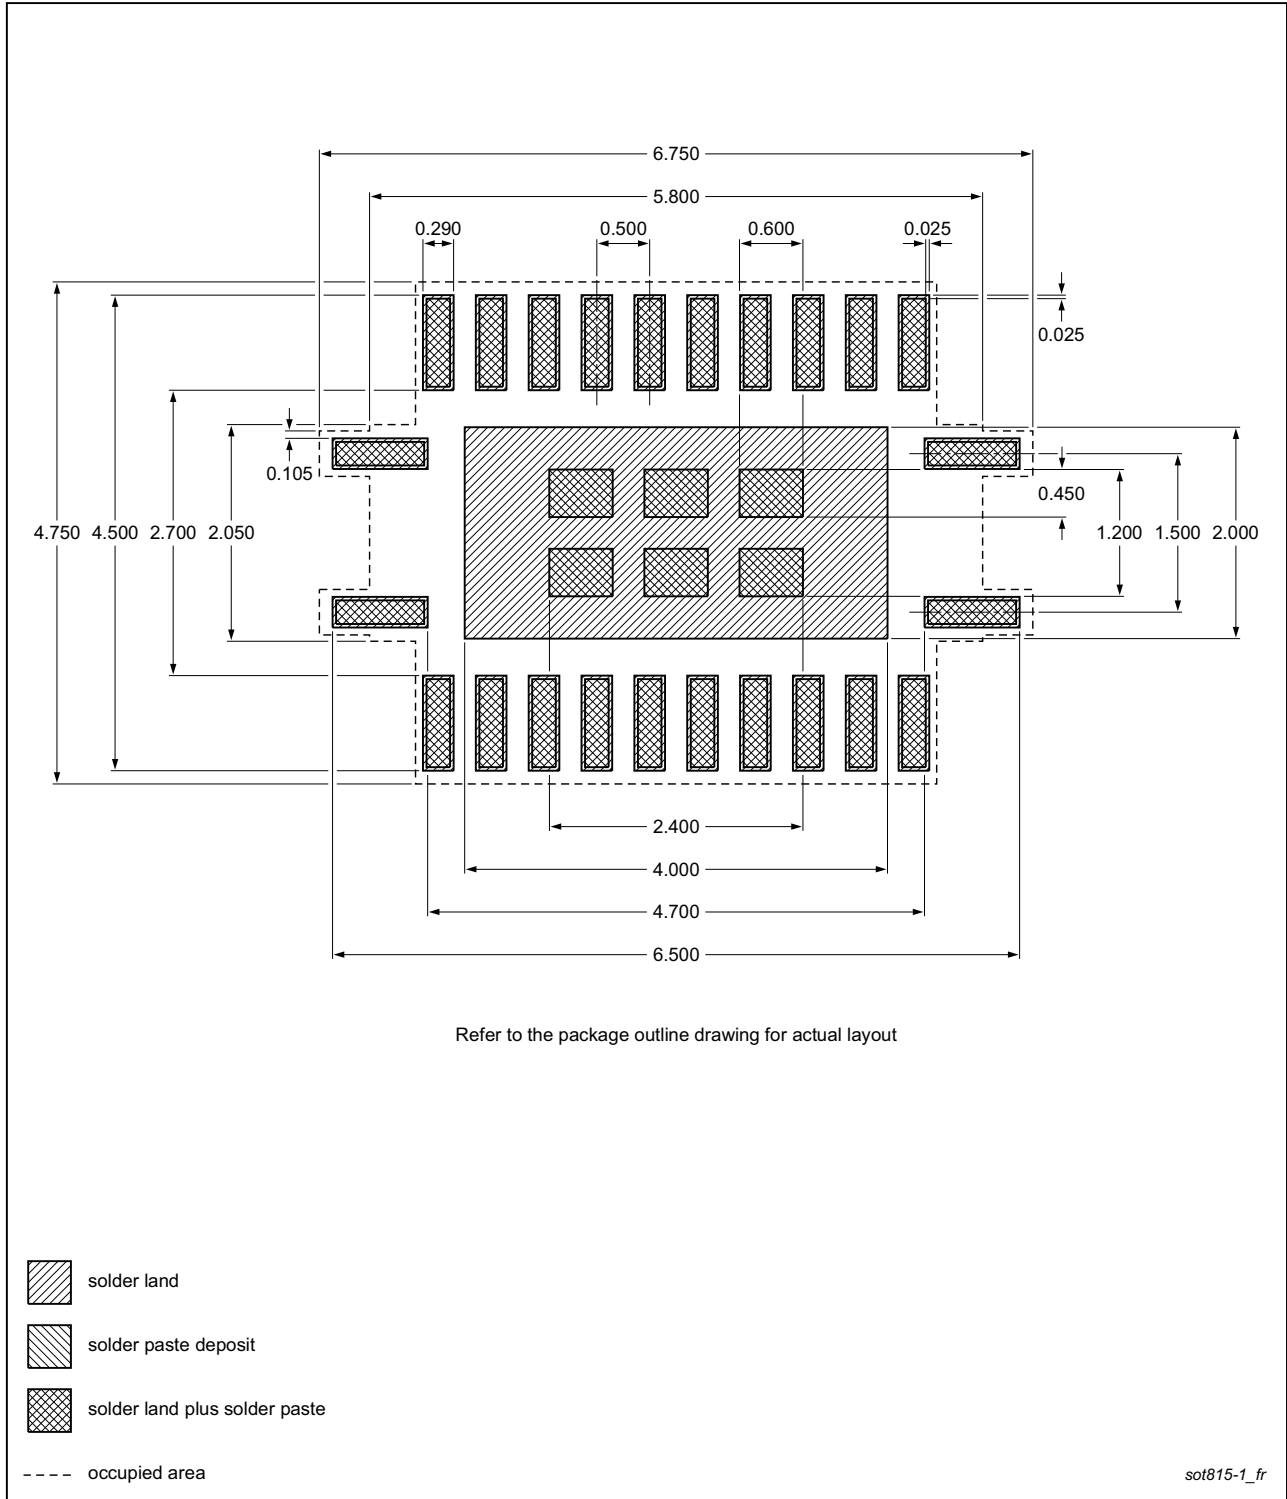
PCB footprint for SOT815-1 (DHVQFN24); reflow soldering
